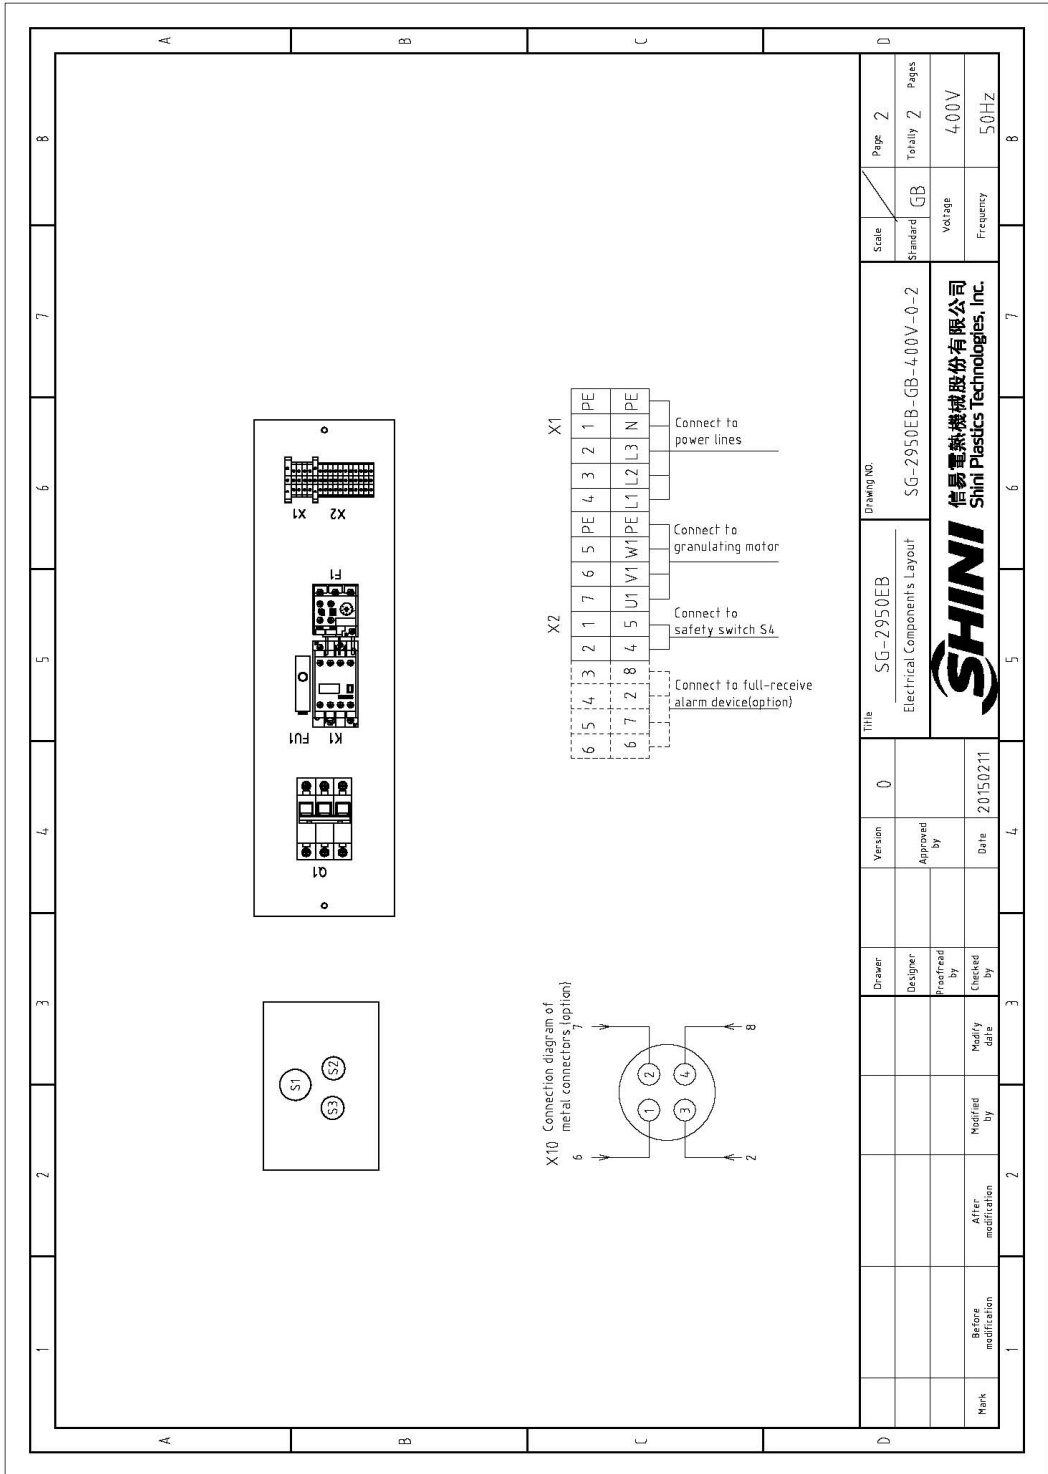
Electrical Components Layout (SG-2540 EB)
